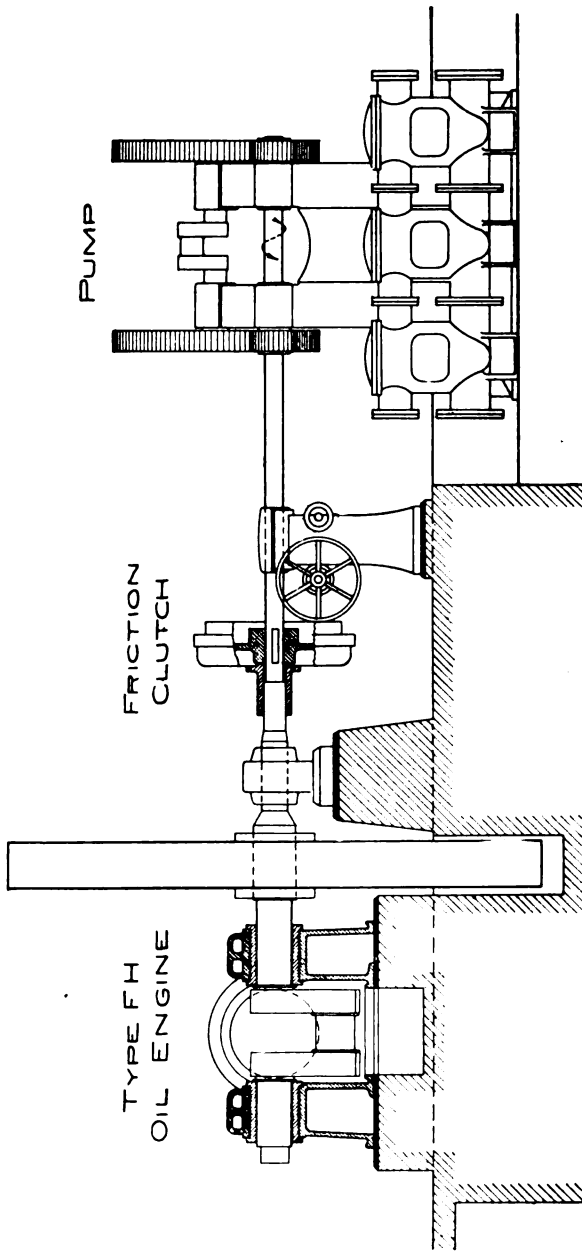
ENGINE AND PUMP INSTALLED WITH CLUTCH CONNECTION
